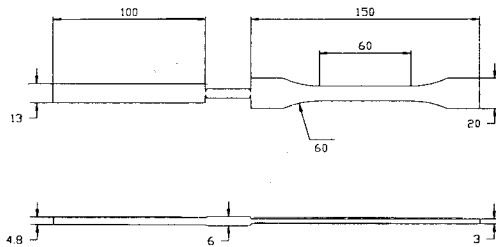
Geometry of mold cavities for tensile and bending specimens (unit: cm).
